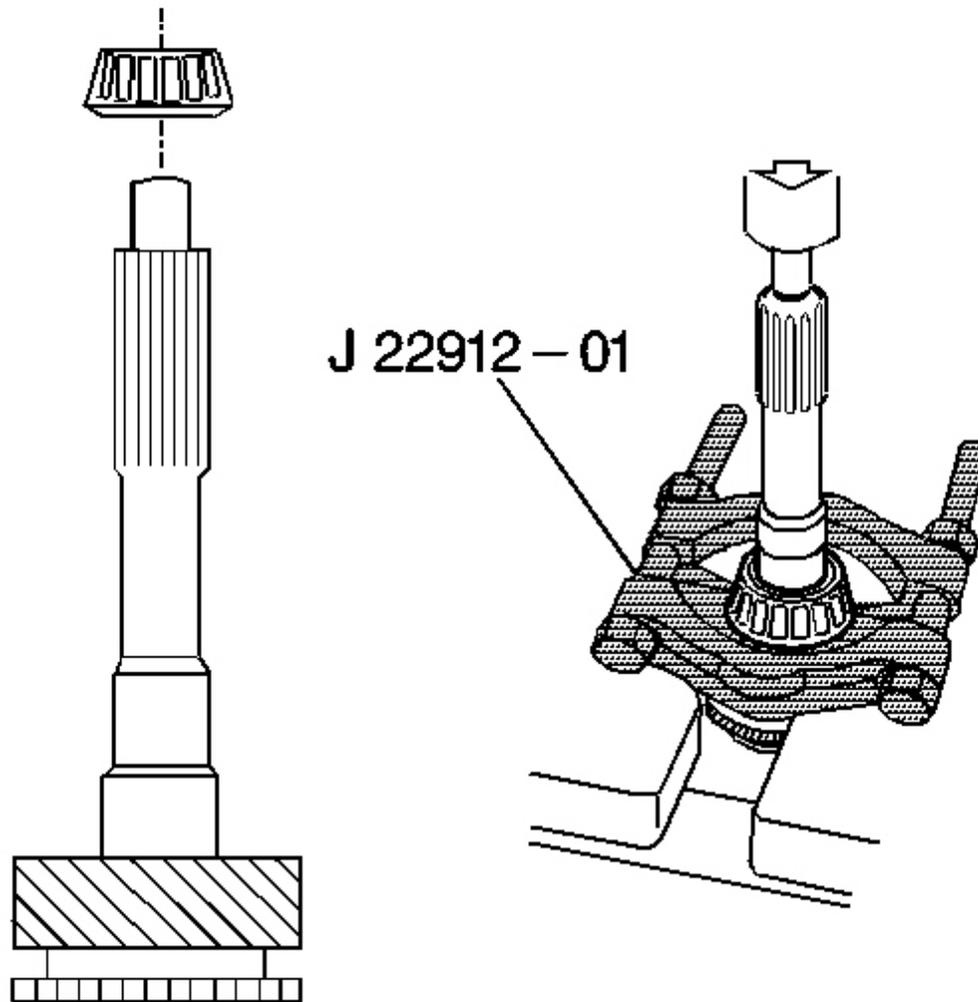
Using J 22912-O1 To Remove Tapered Bearing From Input Shaft
